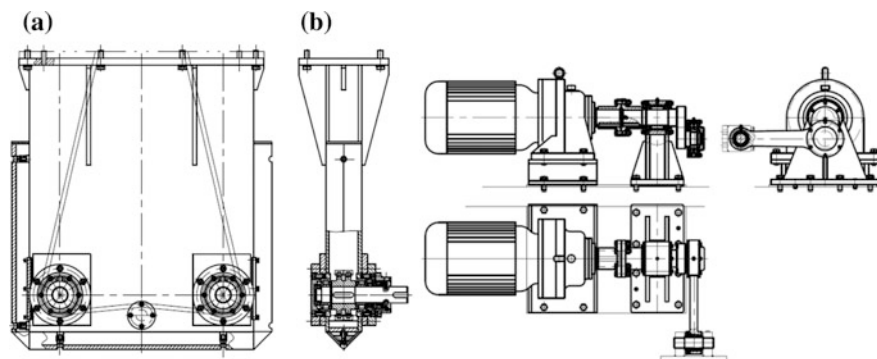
Assembly diagram of rotary spindle component and reciprocating motion component. a Rotary spindle component; b reciprocating motion component
